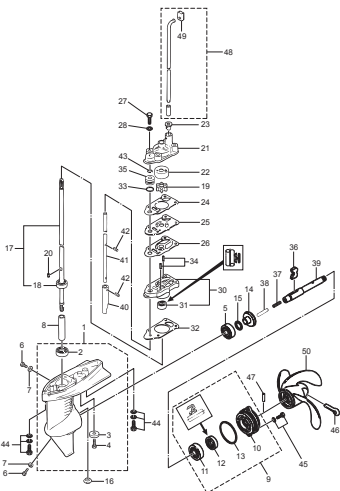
DRIVE SHAFT HOUSING · GEAR CASE (M2.5/3.5A2)
